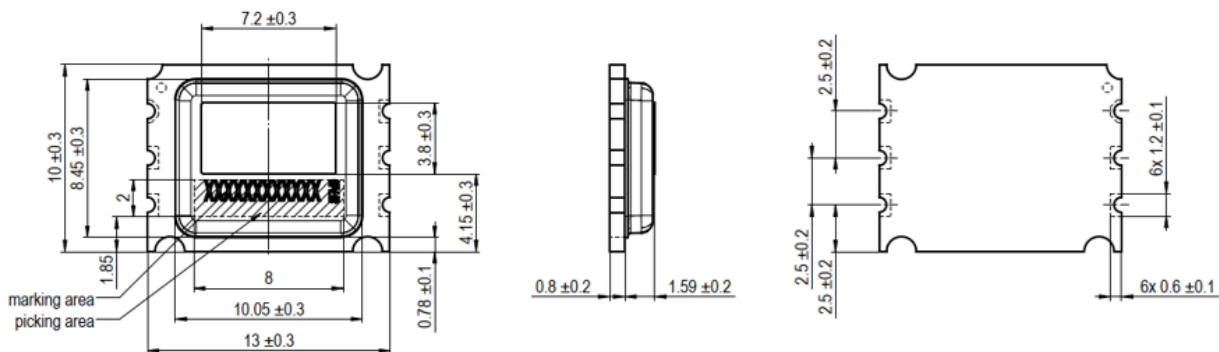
Physical dimensions of the SFA40 sensor (all dimensions in mm): top, side and bottom view.
